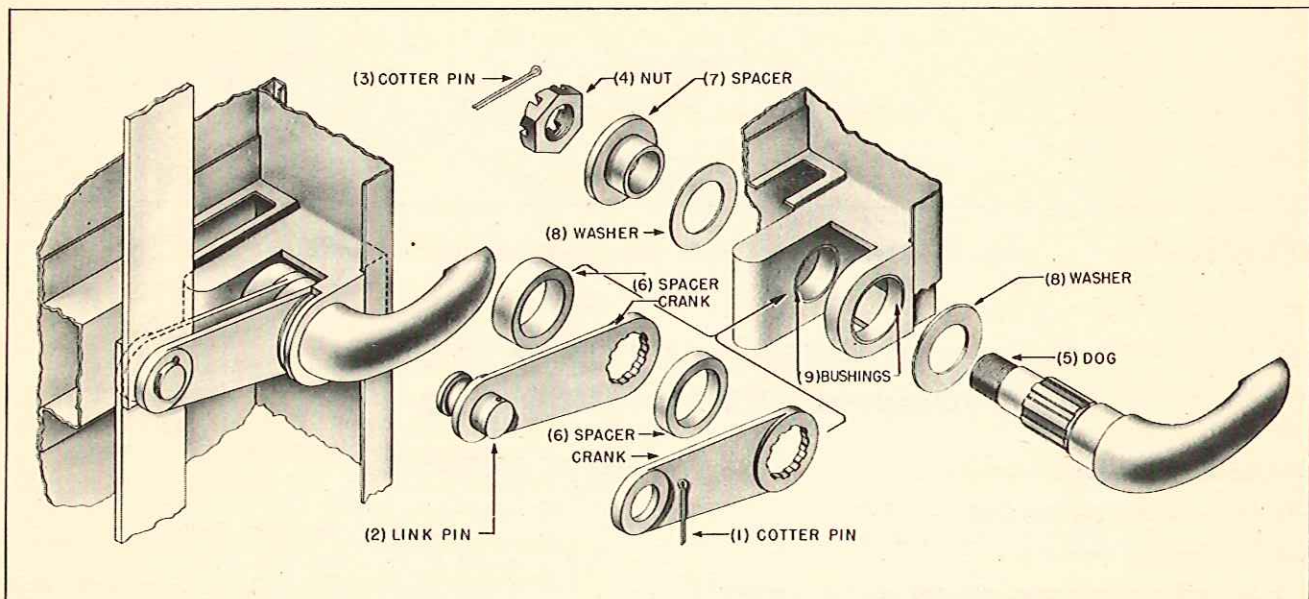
Dog, assembly and exploded views, TLD-3(ms) door.
